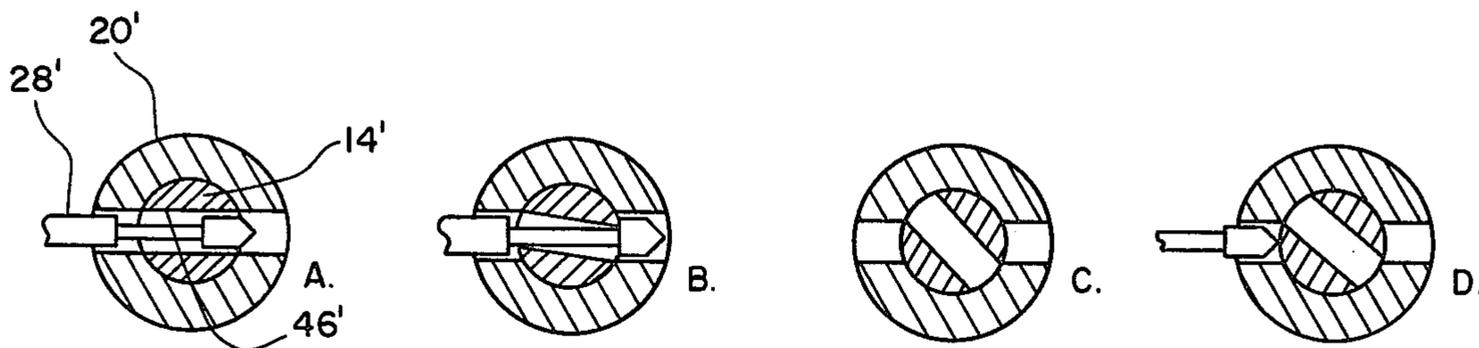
ROTARY SHAFT PRINCIPAL - DIRECT
